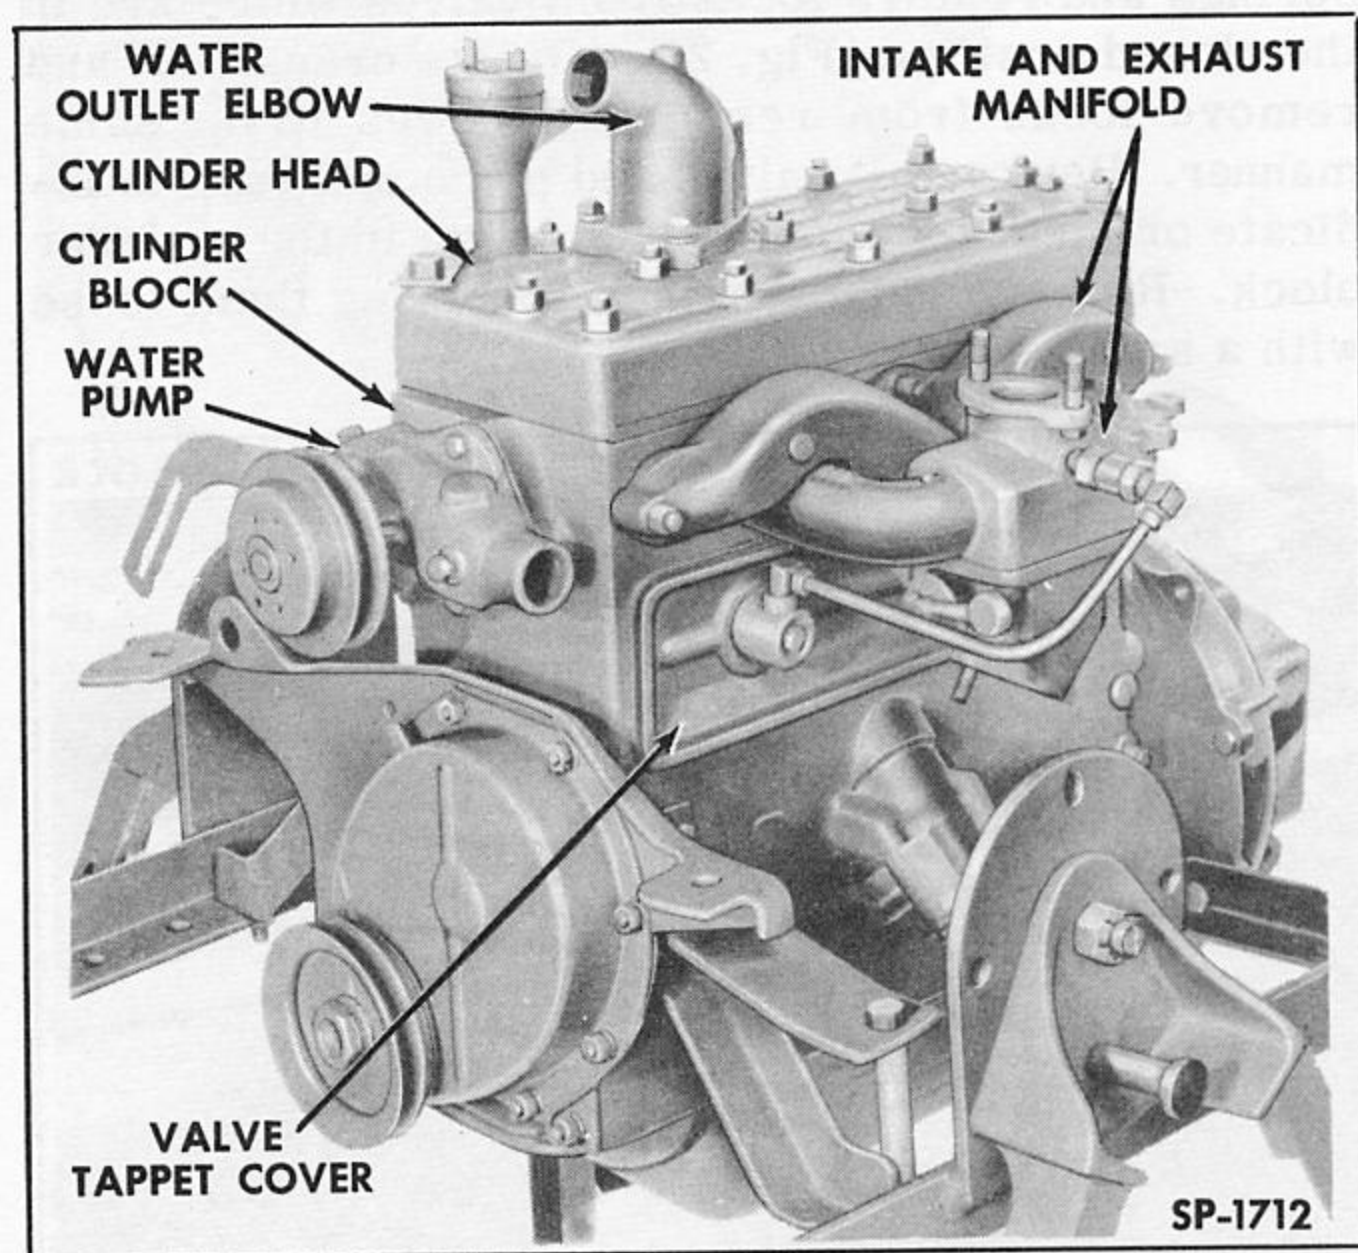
Engine Ready for Disassembly—4 Cylinder Shown
